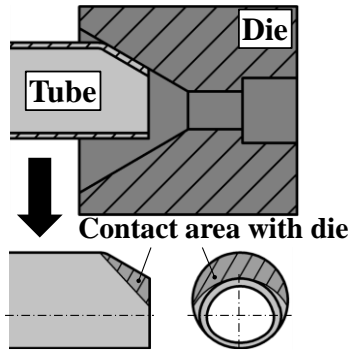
Outline of tube before all of tube tip contacted inner surface of die.
